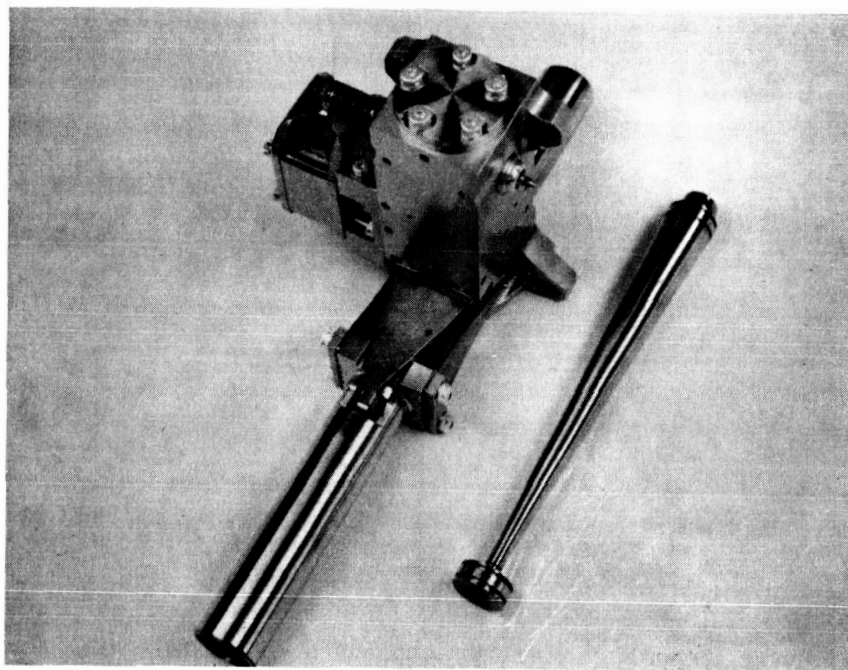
Partial Assembly: Valve, Cam Housing, and Cam
